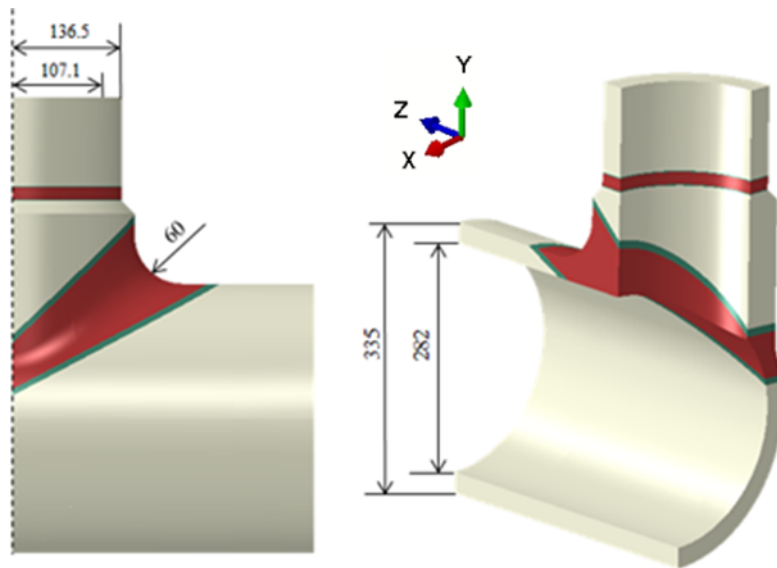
3D weldolet model with key dimensions (in mm) [17, 18].
